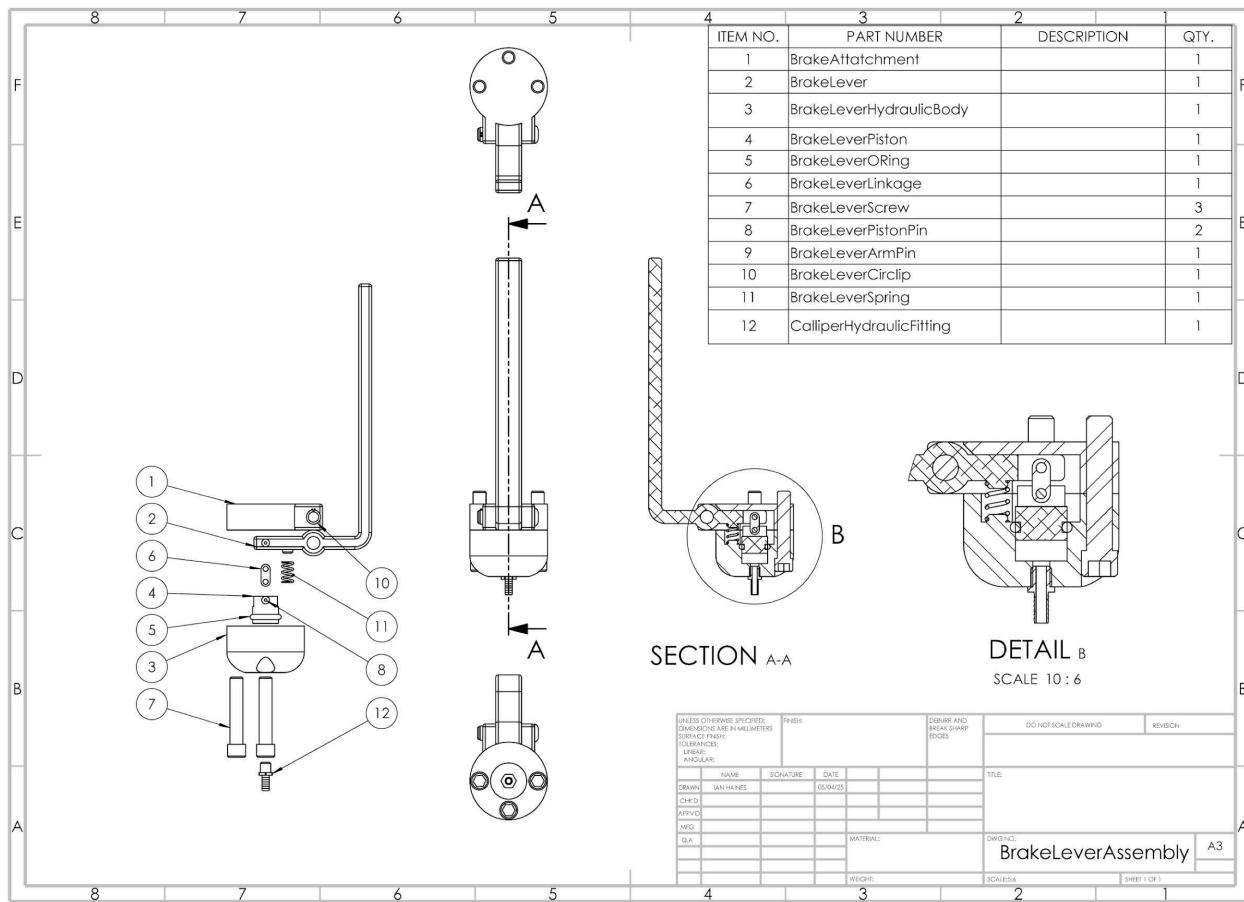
Section view of the brake lever assembly.
